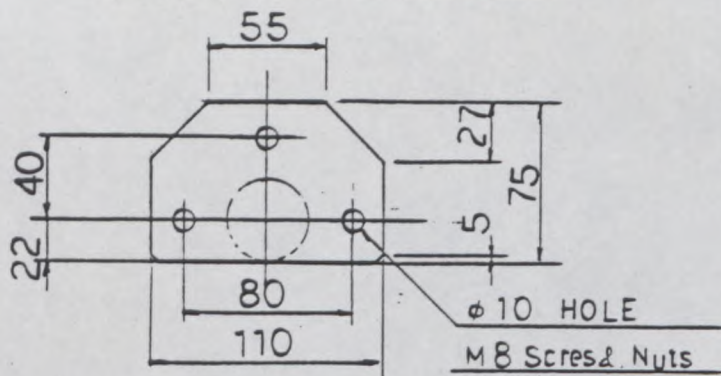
PHOTOS OR DRAWINGS OF THE ATTACHMENTS ON THE BODY:
